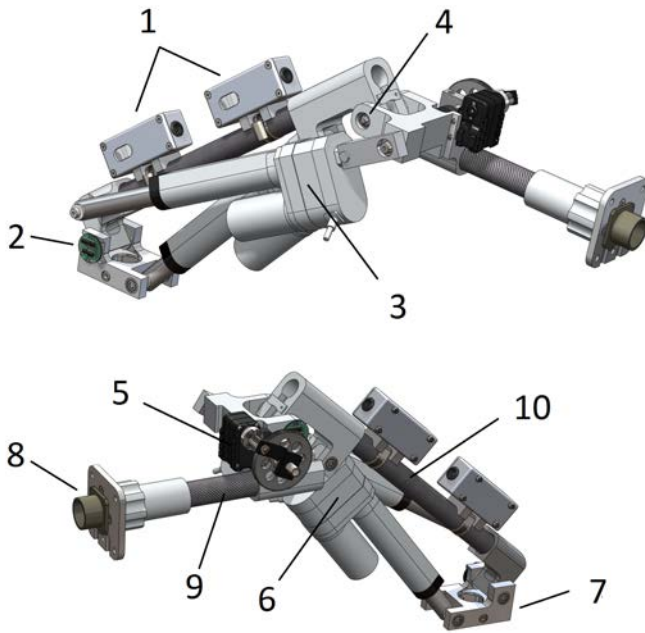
Overview of components for the limb sub-assembly of the robotic arm (1) Motor controller PCB's for shoulder and elbow joint actuators in protective housing (2) Shoulder Joint, rotational position is sensed by an RMB30SI, 13-bit absolute encoder (3) Elbow joint actuator, a 4" stroke 24v electric linear actuator, 270 lbs output force distributed by Midwest Motion Products (4) Elbow joint, rotational position is sensed by an RMB30SI, 13-bit absolute encoder (5) Camera arm mount point (6) Shoulder joint actuator, a 4" stroke 24v electric linear actuator, 270 lbs output force distributed by Midwest Motion Products (7) Attachment point to base assembly (8) Universal attachment point to each of the three end effectors (9) Forearm, constructed from filament wound carbon fiber tube (10) Upper arm, constructed from filament wound carbon fiber tube
